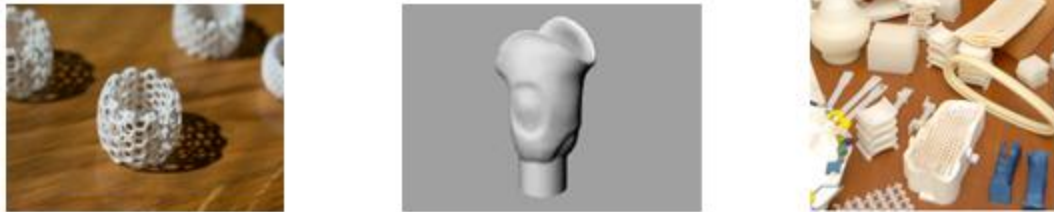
Parts from the SLS machine [21, 22 & 23]
